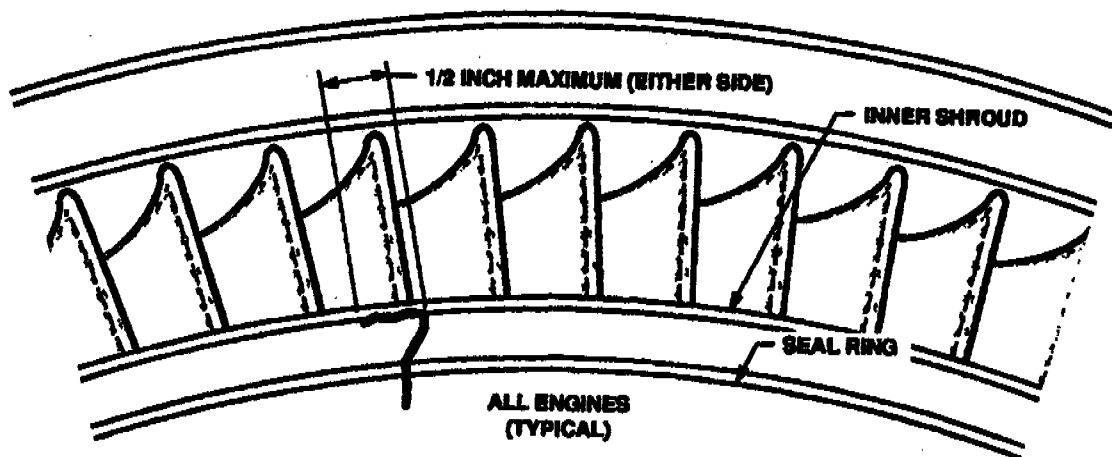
First Stage Power Turbine Nozzle Assembly Inspection Areas.
